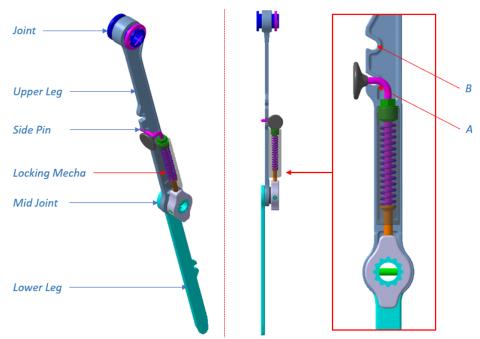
Left: FS assembly with its main components. Right: Locking mechanism detail, showing two slots — A for the locked position and B for the unlocked position.
